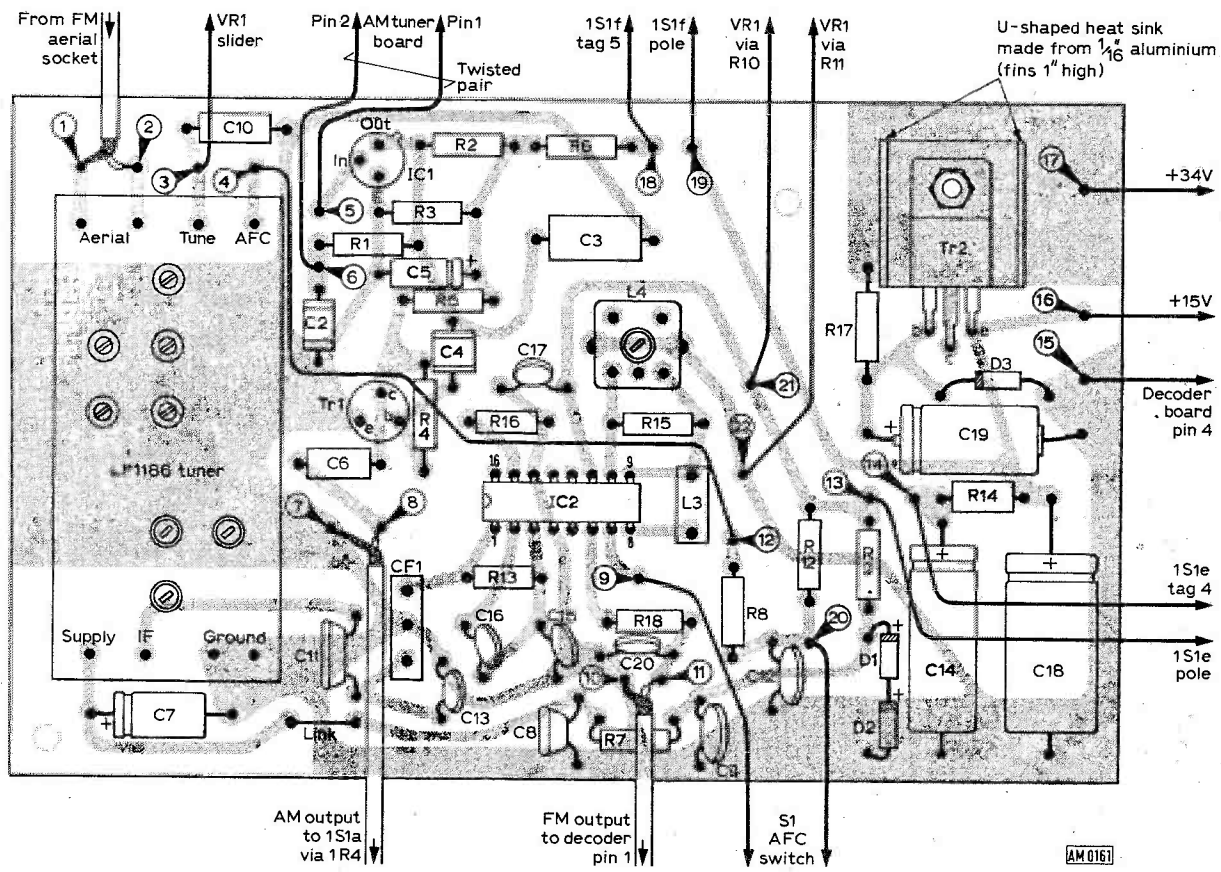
Component location and printed circuit layout for the main Tuner and IF board. Both drawings are actual size.
